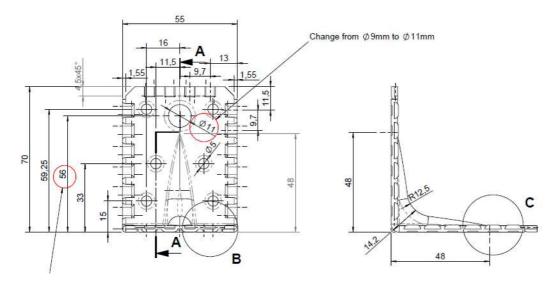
Dimensions of Angle Bracket 70 with rib, thickness 1,5 mm
